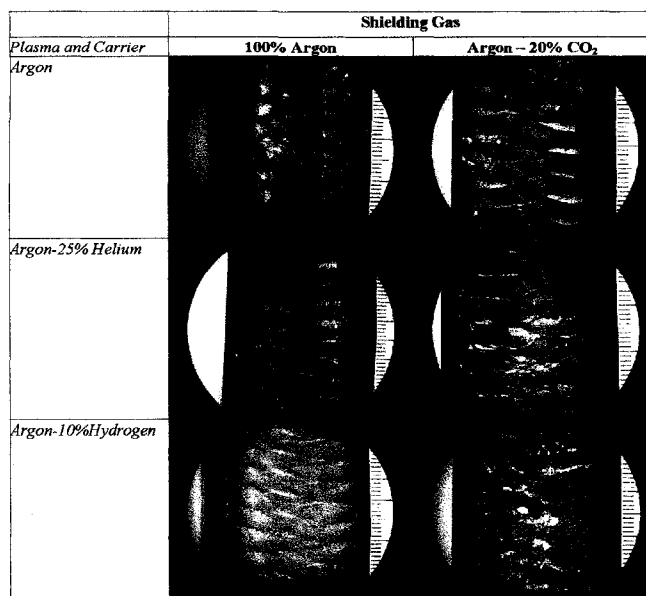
As-Welded Macrographs of 410SS Overlays with CO₂ Shielding Gas
